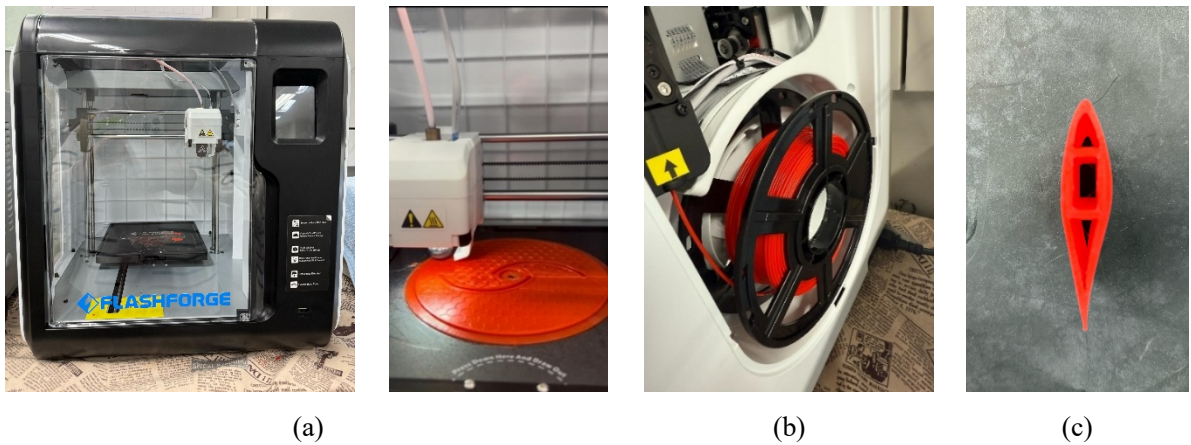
3D Printer Machine (a), PLA Material (b), and 3D Printing Result of the Darrieus with a Hollow
